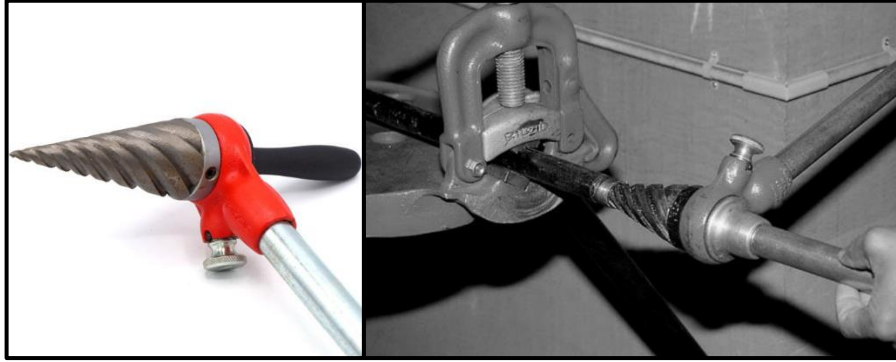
Pipe reamer (left) and removing burrs from the edge of steel pipe with pipe reamer (right)
